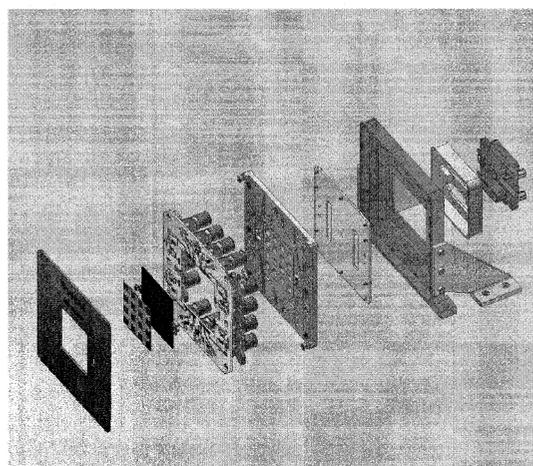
Camera design: exploded view. From left to right: protection cap, backshort wafer, HEB wafer, IF board, mirror plate, dc board, housing, dc connector holder, dc connectors.
